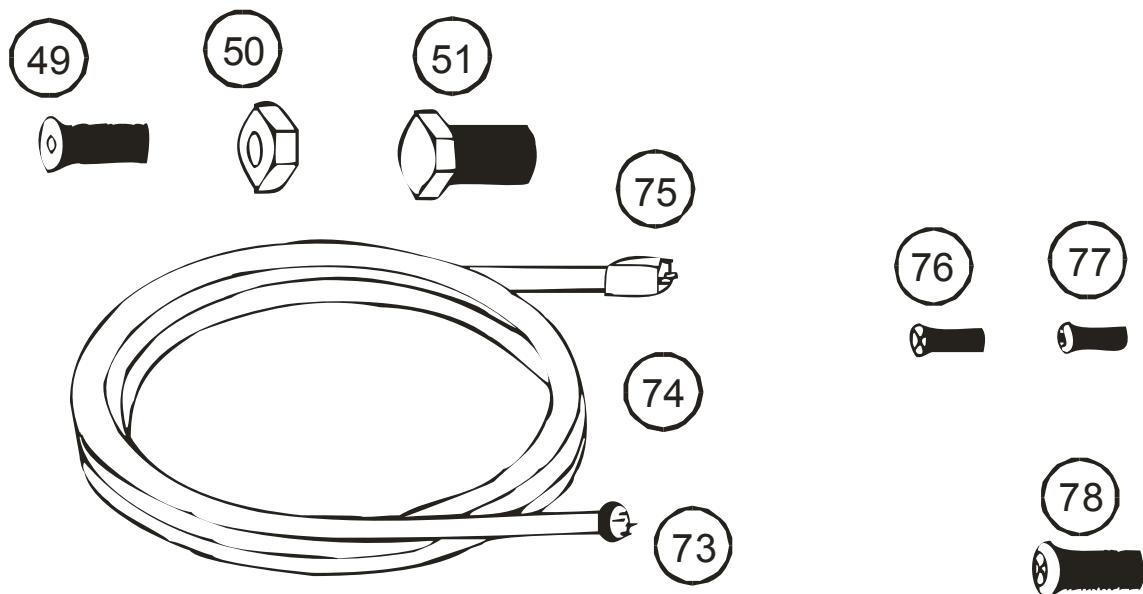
TRH Screws, bolts/nuts, and power cord.
